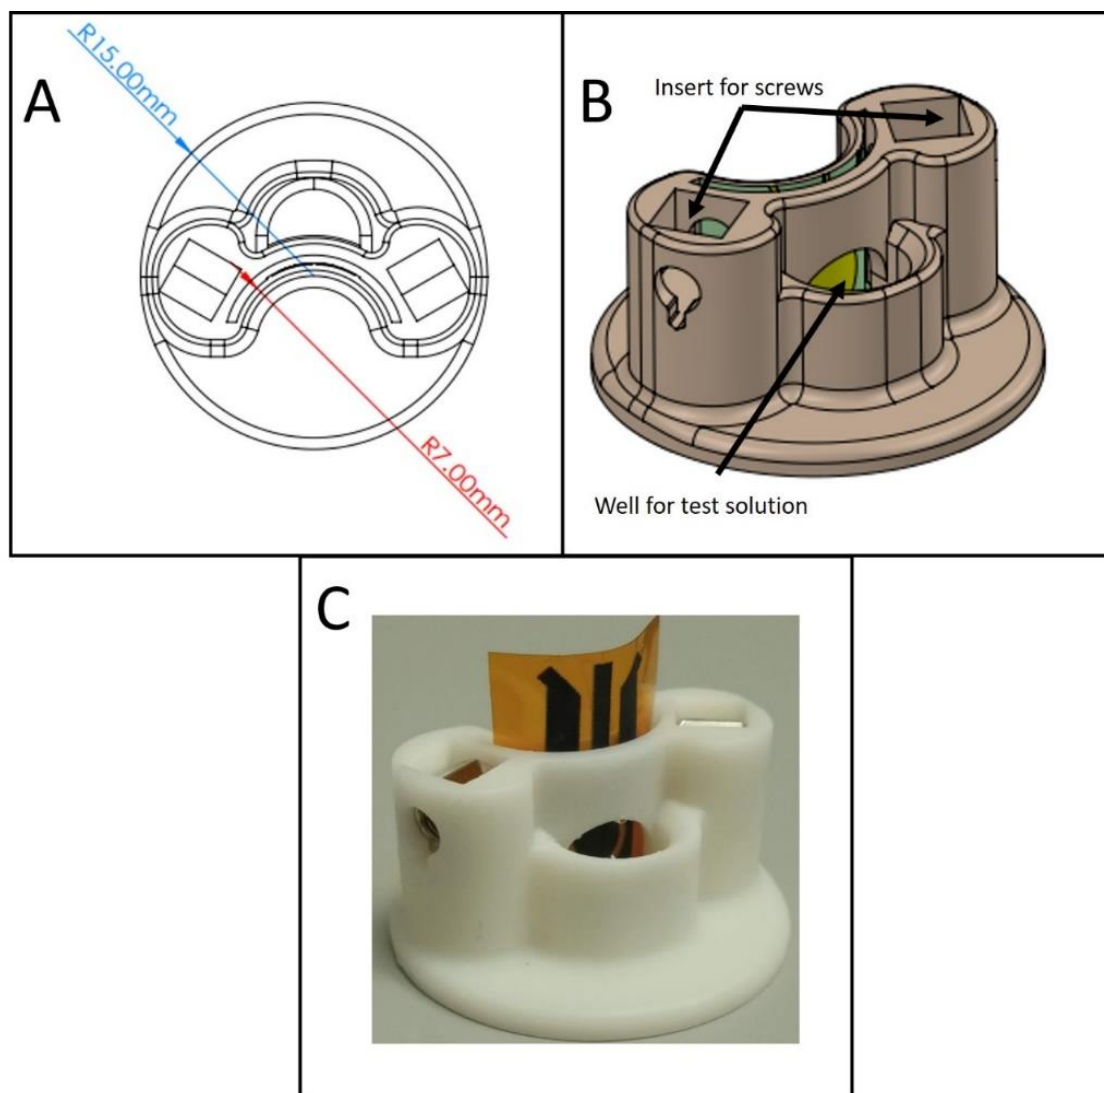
(A) Drawing of a 3D printed holder indicating the bending radius of the insert for the PI-PET film, (B) 3D model of the holder indicating where the screws are inserted to 'fix' the PI-PET film in place.(C) Picture of 3-D printed holder with the sensor in place.
